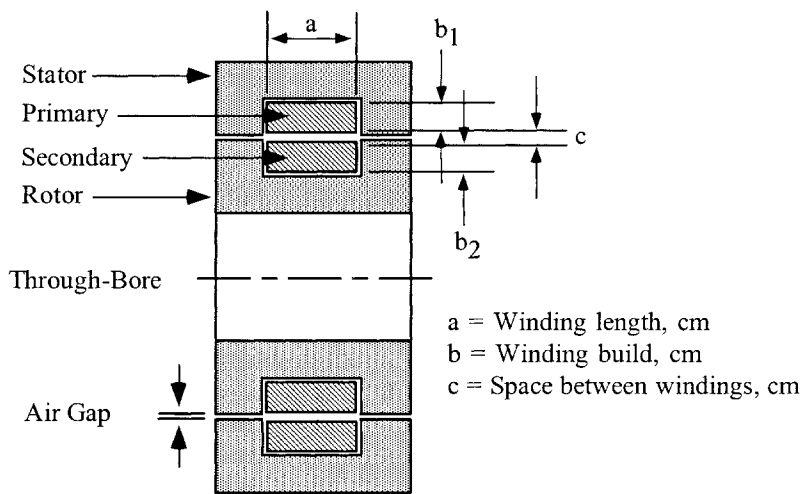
Axial Rotary Transformer, Showing Winding Dimensions.
